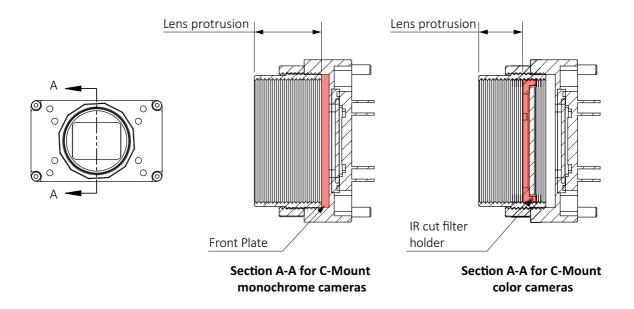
Cross section of typical Prosilica GX front assembly with C-Mount
